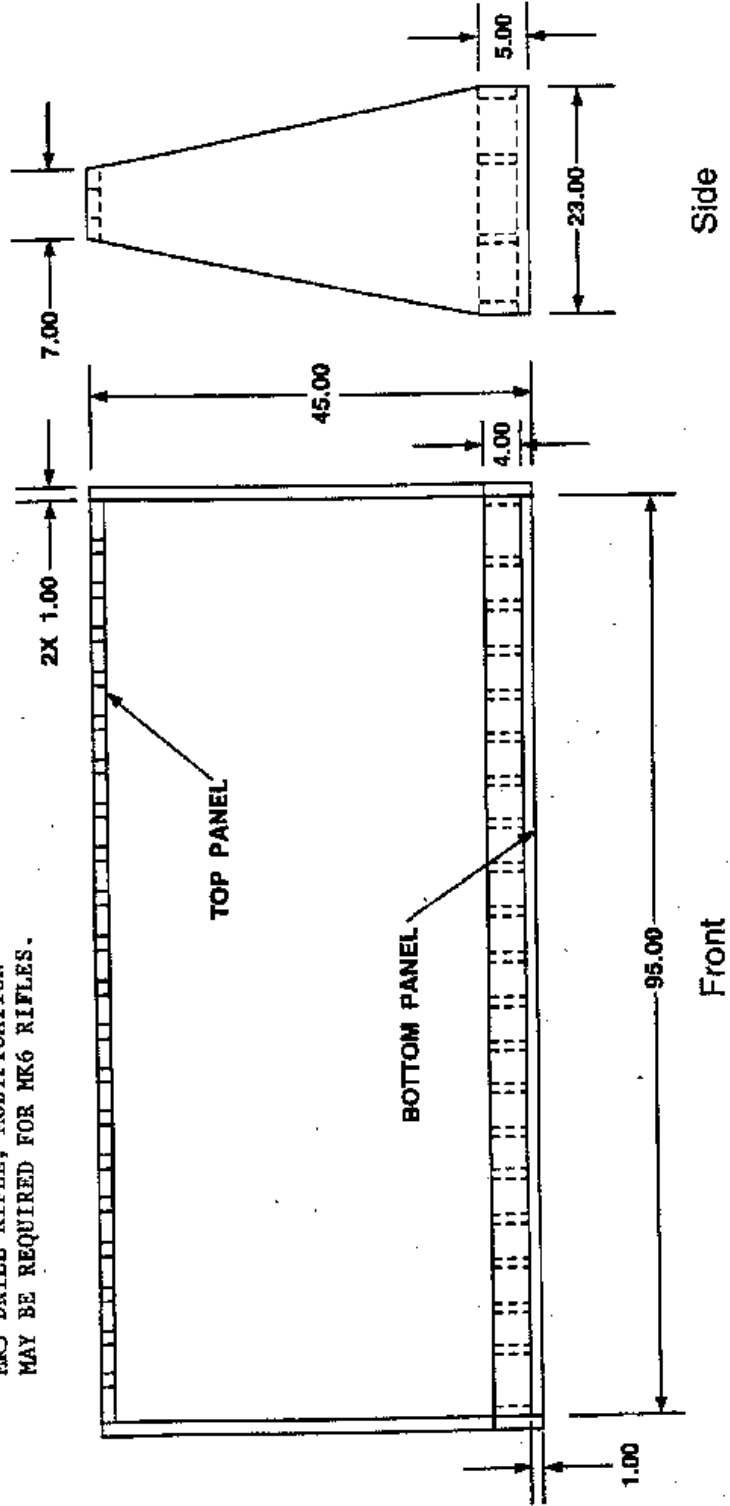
Wall Style Drill Rifle Storage Rack (Cont'd)
